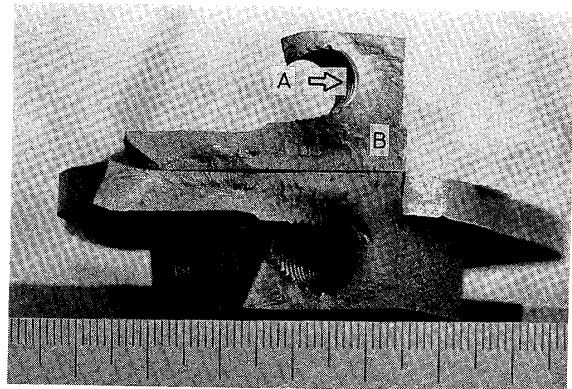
Fracture surface of plane cam (in mm).
